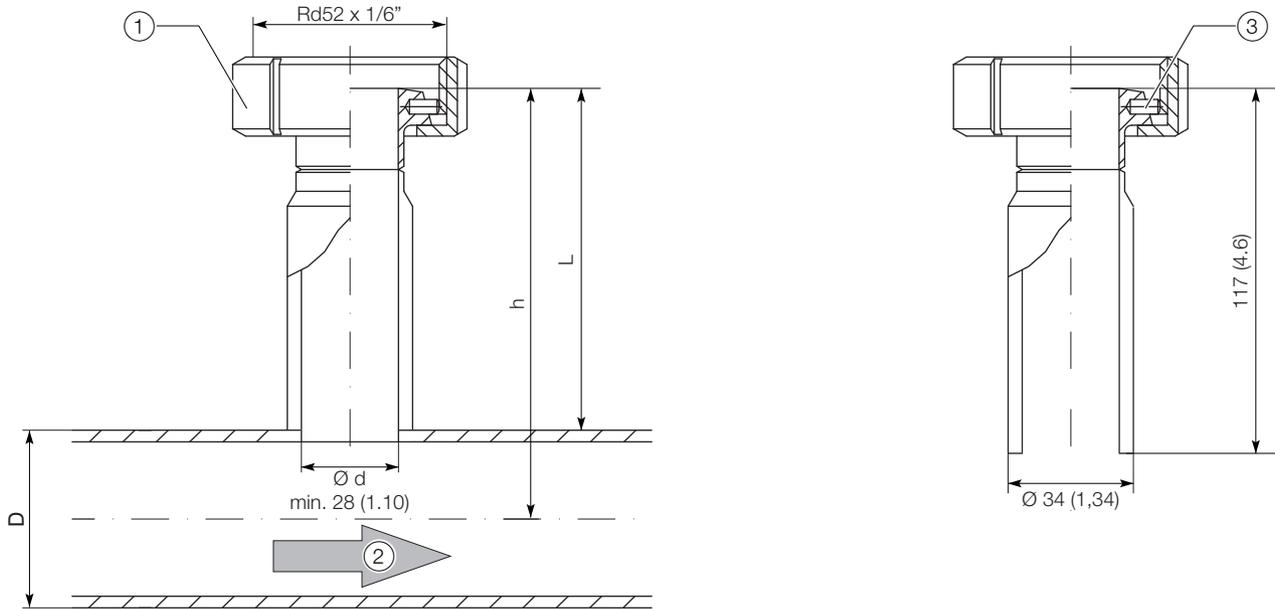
Welding adapter with flange - all dimensions given in mm (inch).
